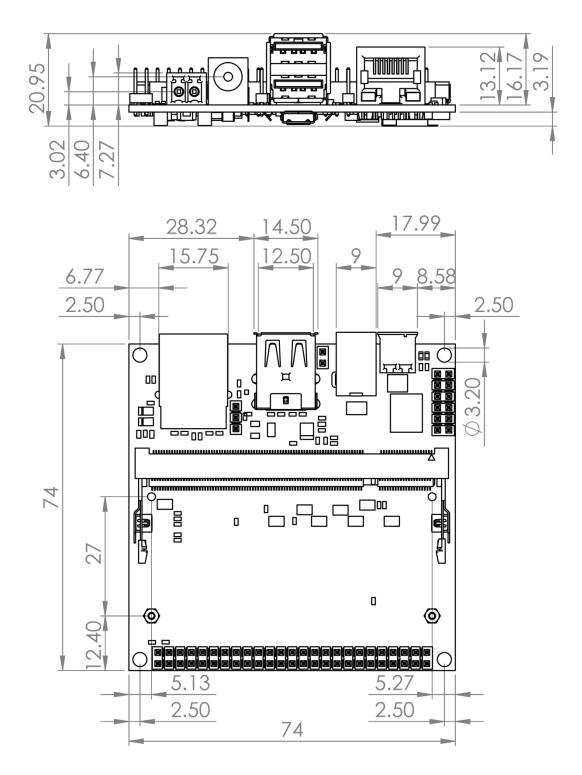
Viola Dimensions – Top Side, all dimensions are in millimetres (mm)
